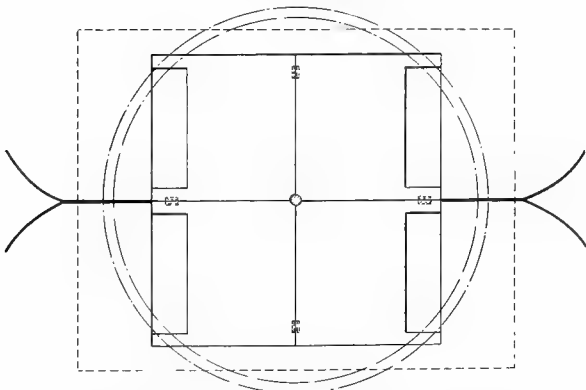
Cross Section Through Double Exterior Hood of EB Type Automatic Ventilator.
